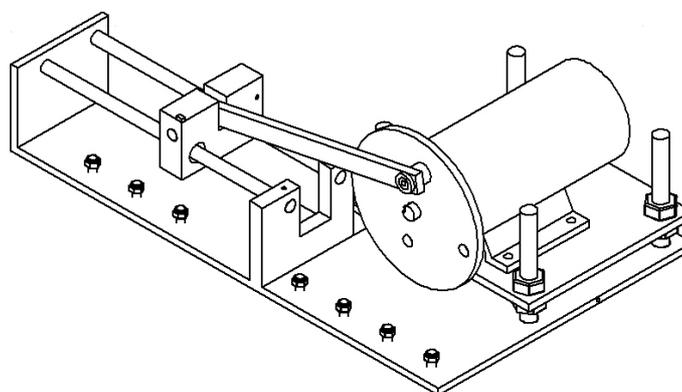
Mechanism construction: slider – crank mechanism (isometric)
